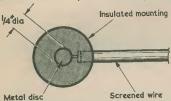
The gentre lead of the screened wire connects to the touch-button, which consists of a metal disc fitted on an insulated mounting.
